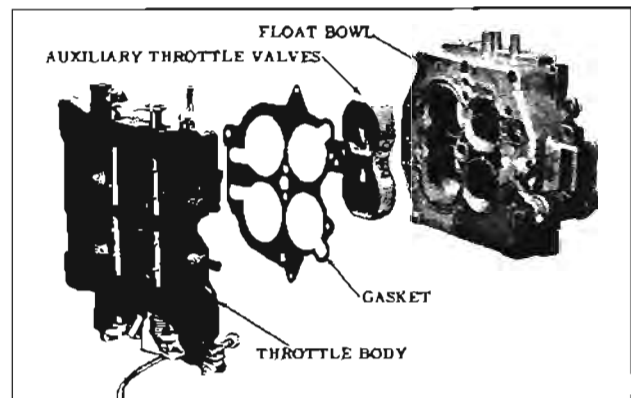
Throttle Body and Auxiliary Throttle Valves
